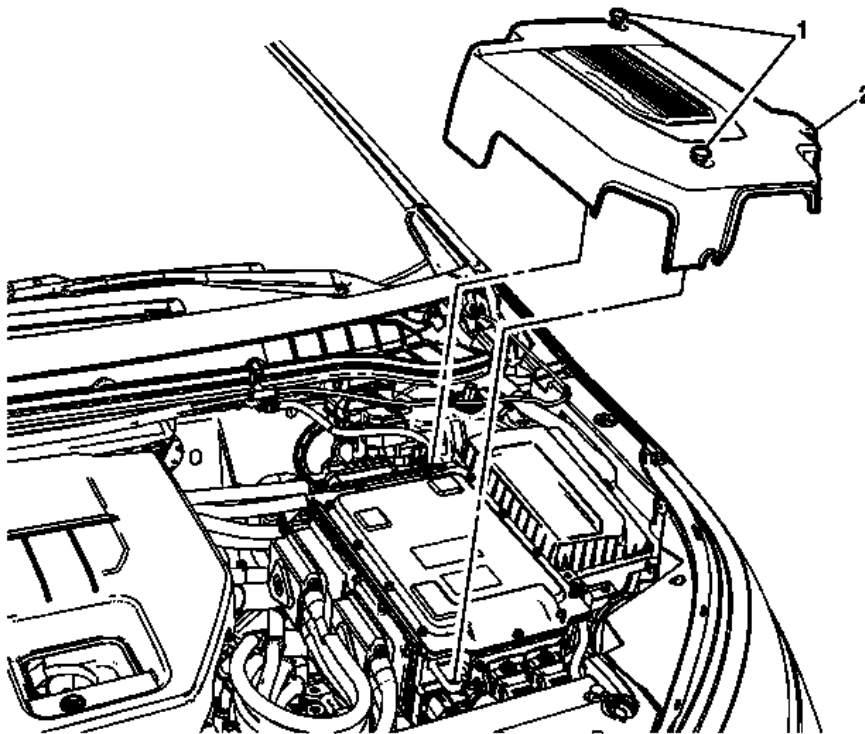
Drive Motor Generator Power Inverter Module Cover
